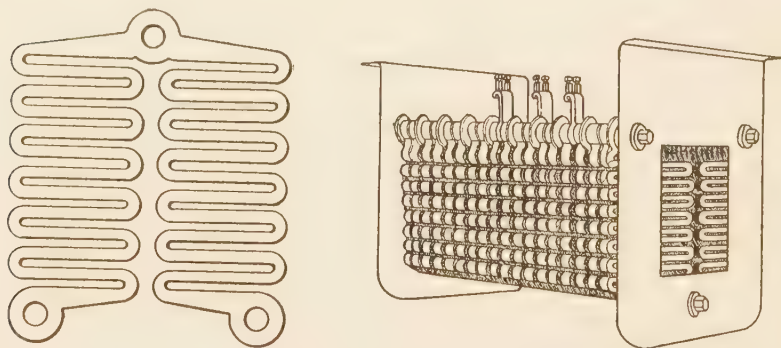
Assembled frame of grid resistors, and separate unit.
